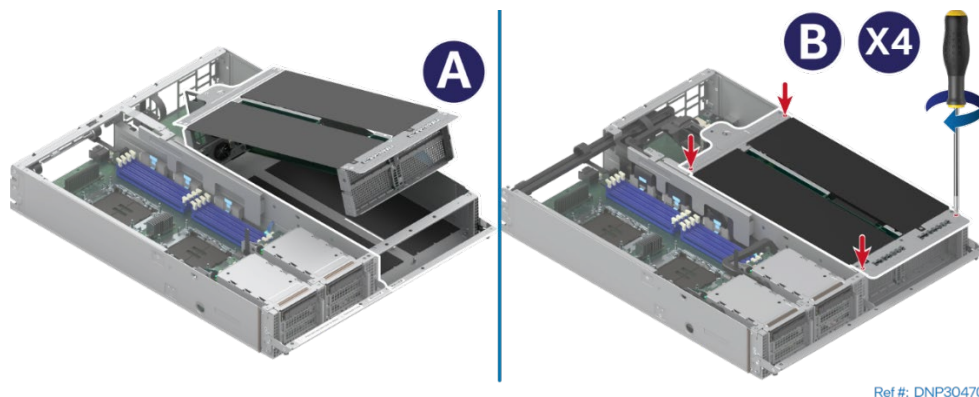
Installing PCIe* Accelerator Module Riser Assembly
